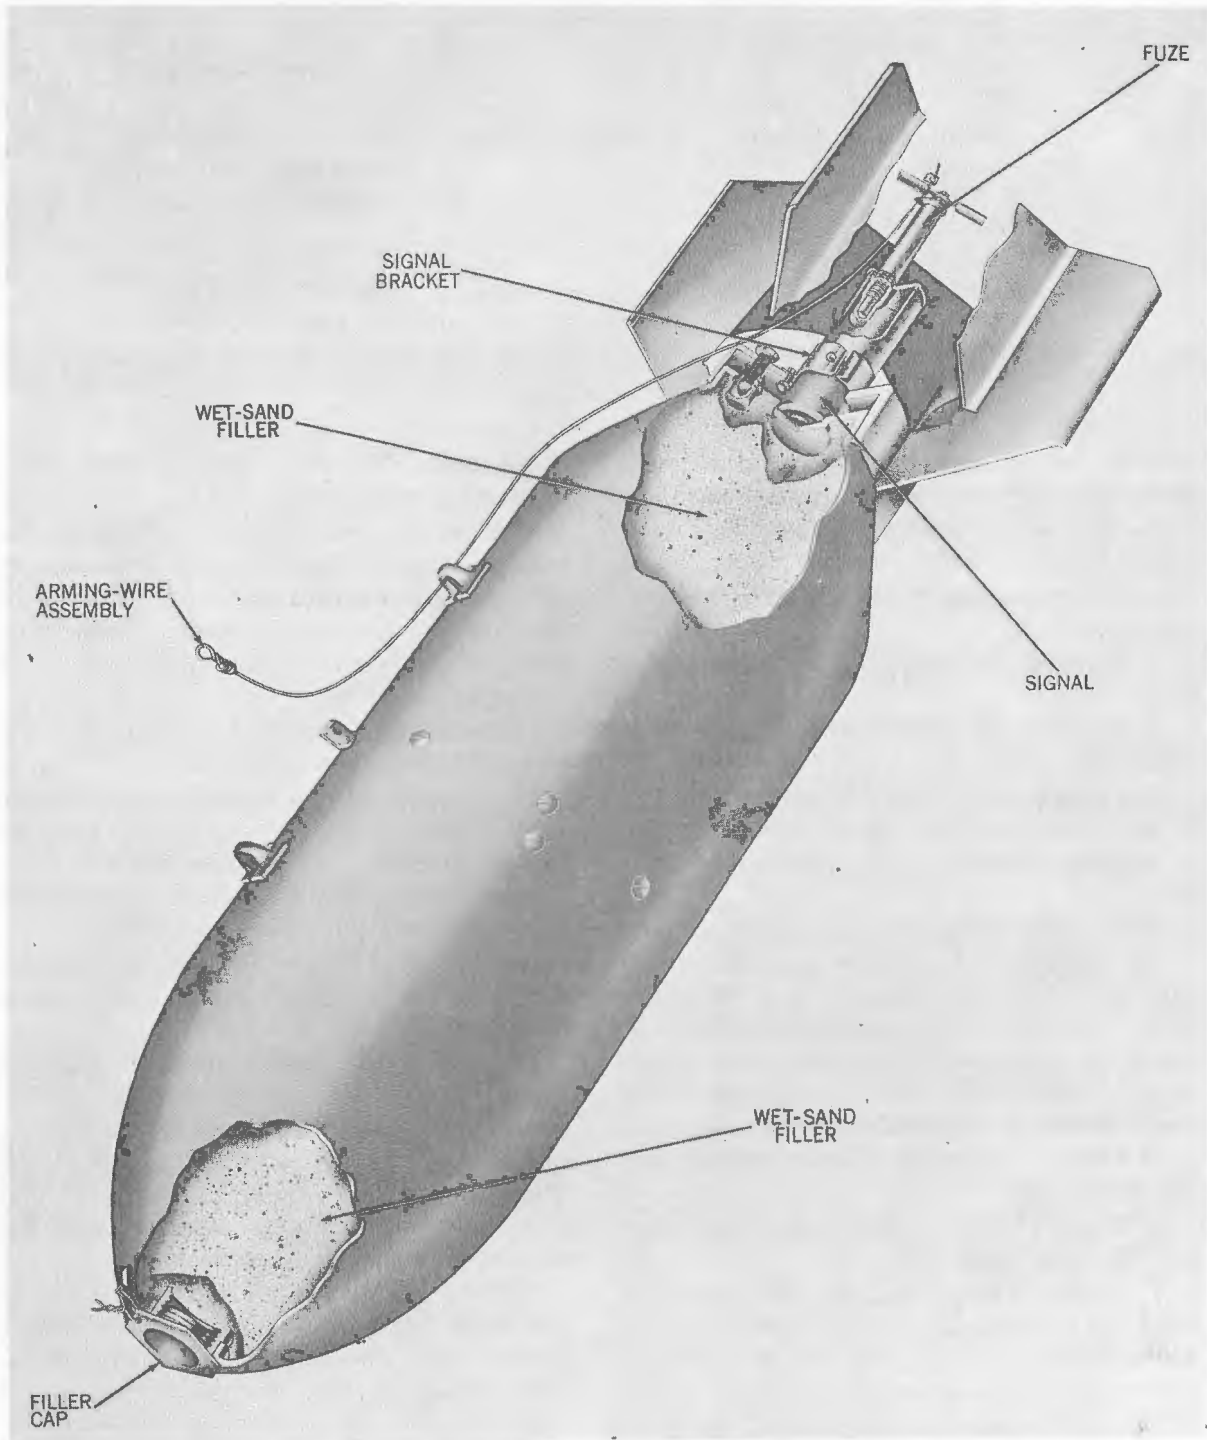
500-lb Practice Bomb Mk 65 Mod 0, Cutaway View.
